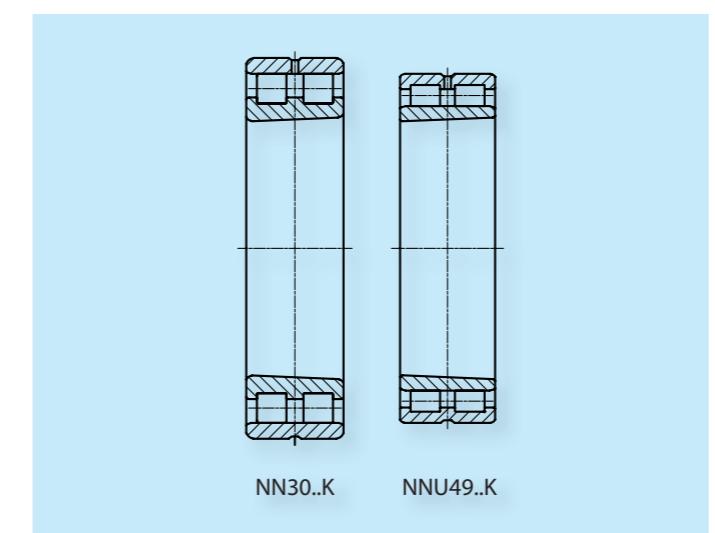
series of double-row high-precision cylindrical roller bearing
